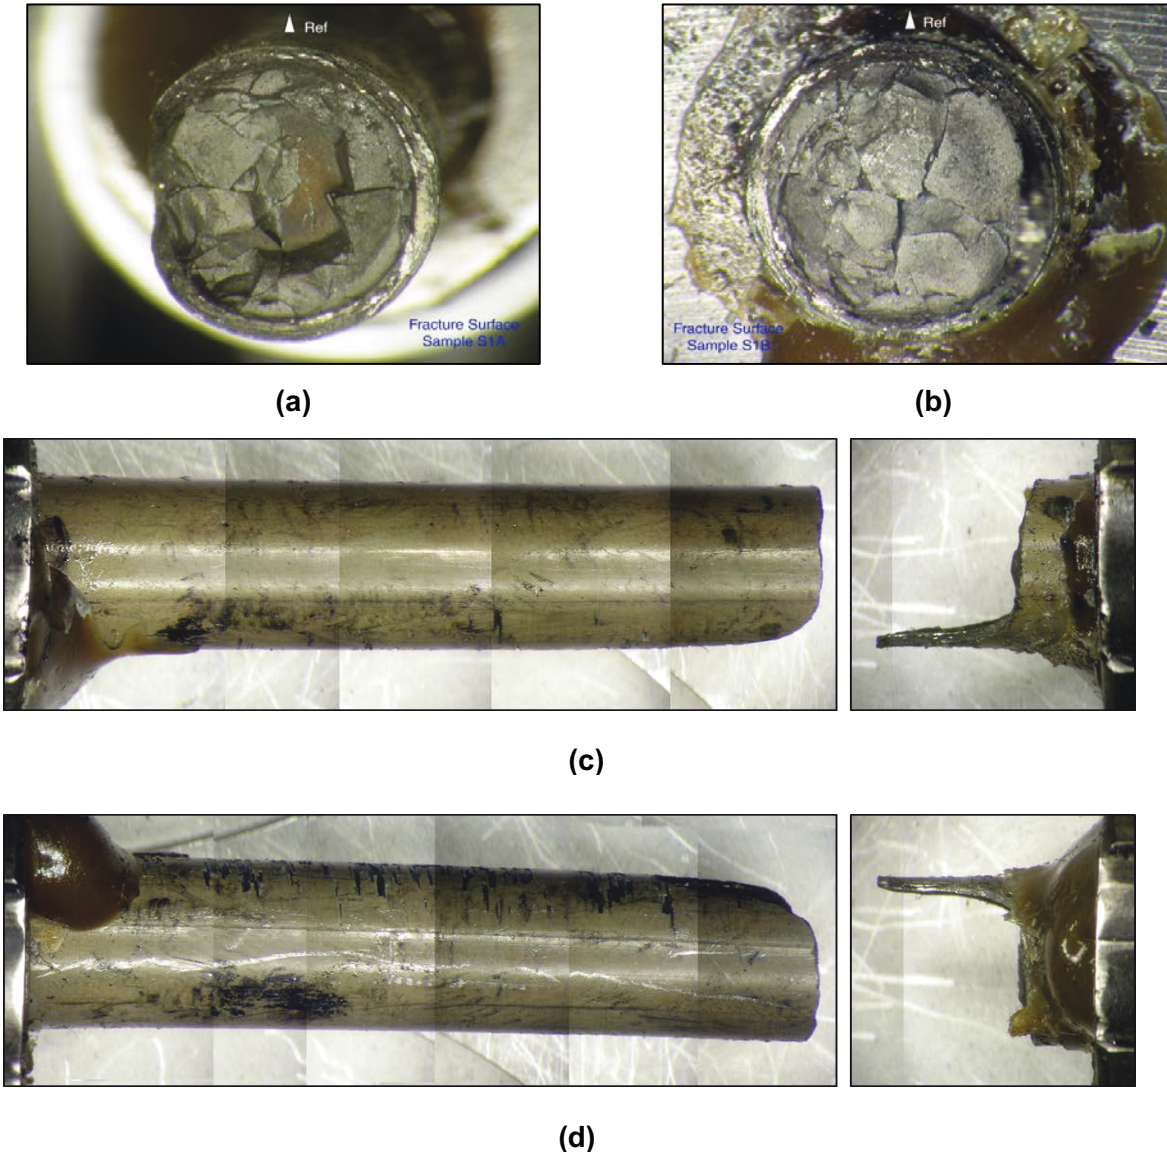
Mating fracture surfaces (a) and (b); lateral sides near the neutral axis of the bending rod for S1 (606C3C) (c) and (d)
